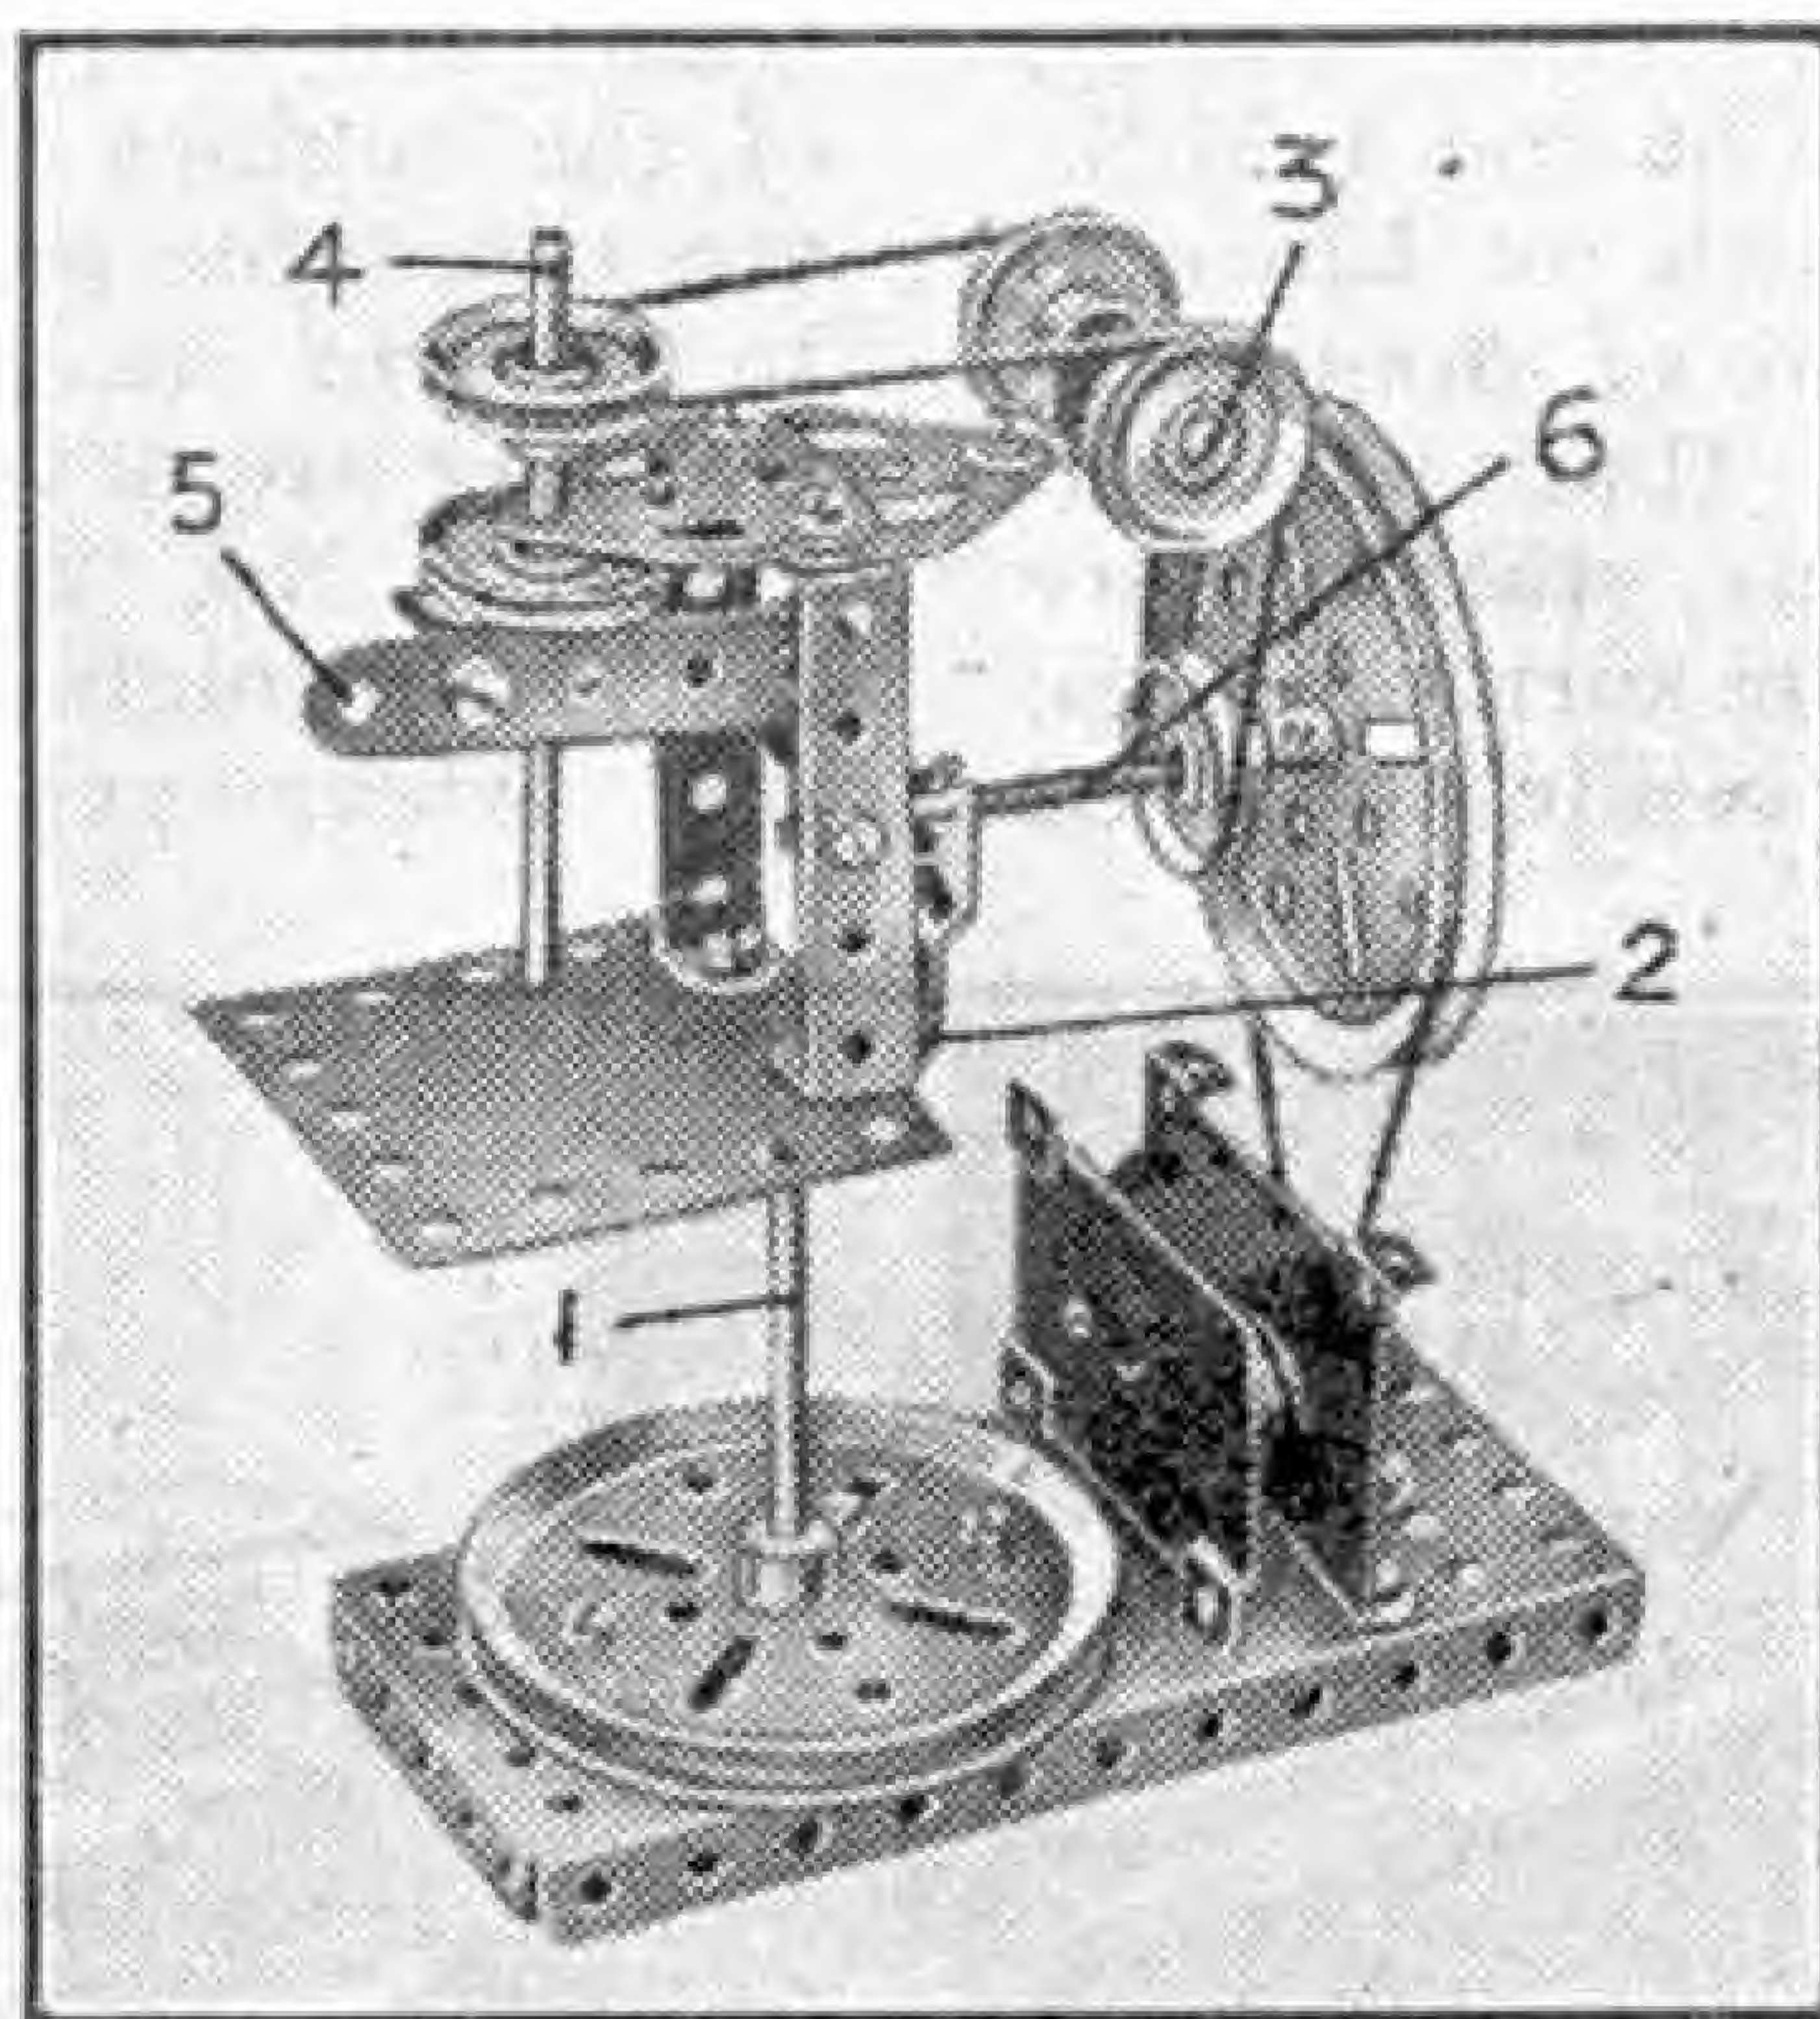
A model drilling machine driven by a "Magic" Motor.
